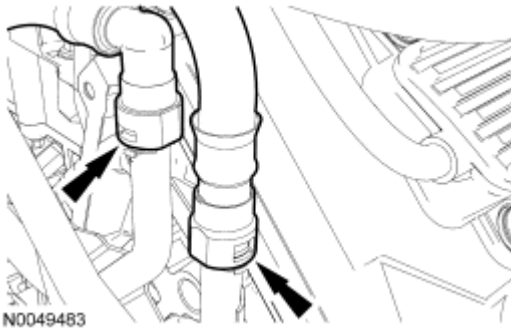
Disconnecting Heater Hoses From Coolant Tube Assembly At Rear Of Engine
